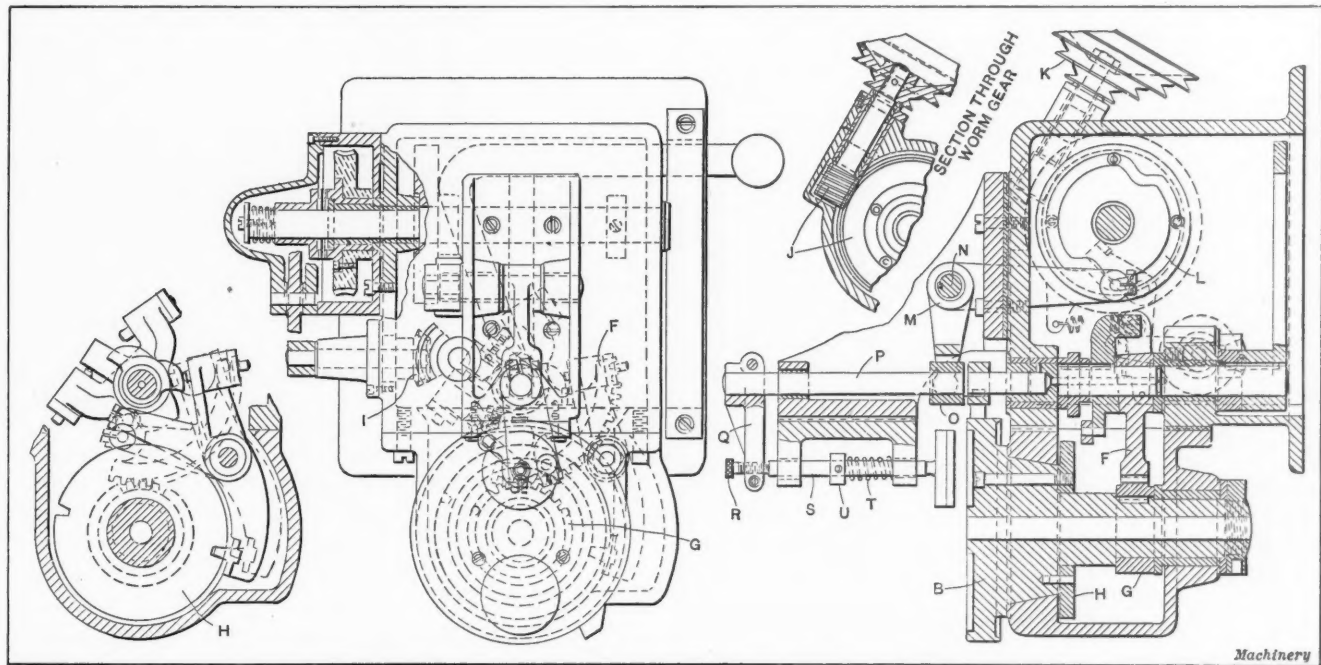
Construction of the Dial Printing Machine shown in Fig. 48
